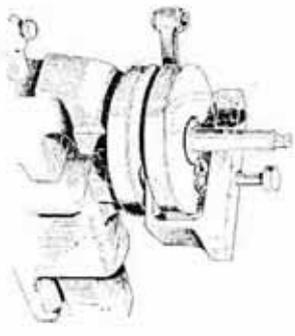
METHOD OF SEPARATING FLYWHEELS.
